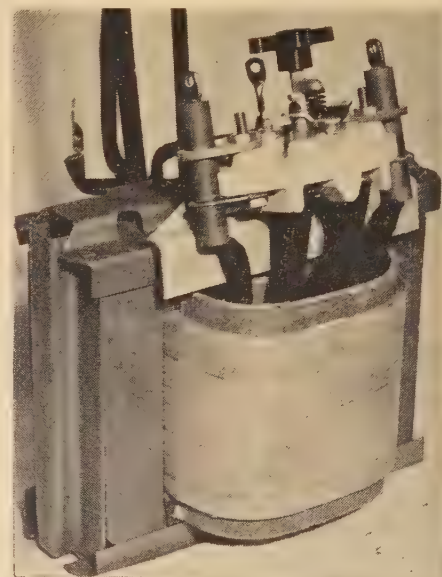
Protective links mounted on core and coil assembly for distribution transformers
